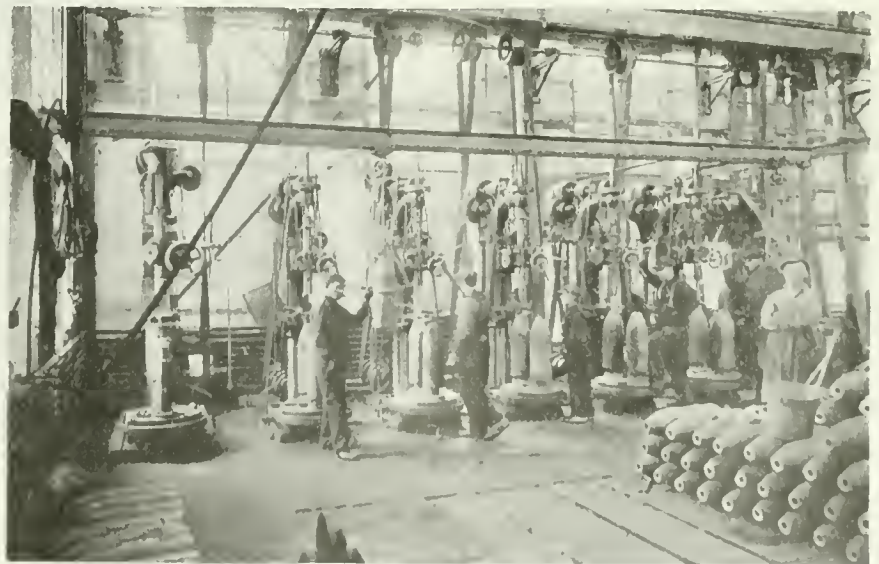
BATTERY OF DRILL PRESSES WITH REVOLVING TABLE EQUIPMENT, DRILLING AND FACING HOLE IN NOSE.
